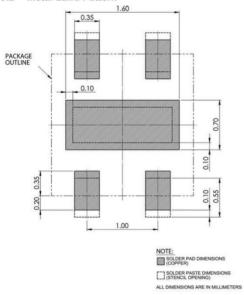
Recommended metal land pattern for SHTC3 (all dimensions are in mm). Recommended solder paste stencil thickness is 100 µm, pads on PCB are recommended to be non solder mask defined (NSMD).
